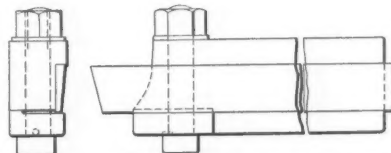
Cutting-off Tool-holder with Cutter held by Combination Clamp.
